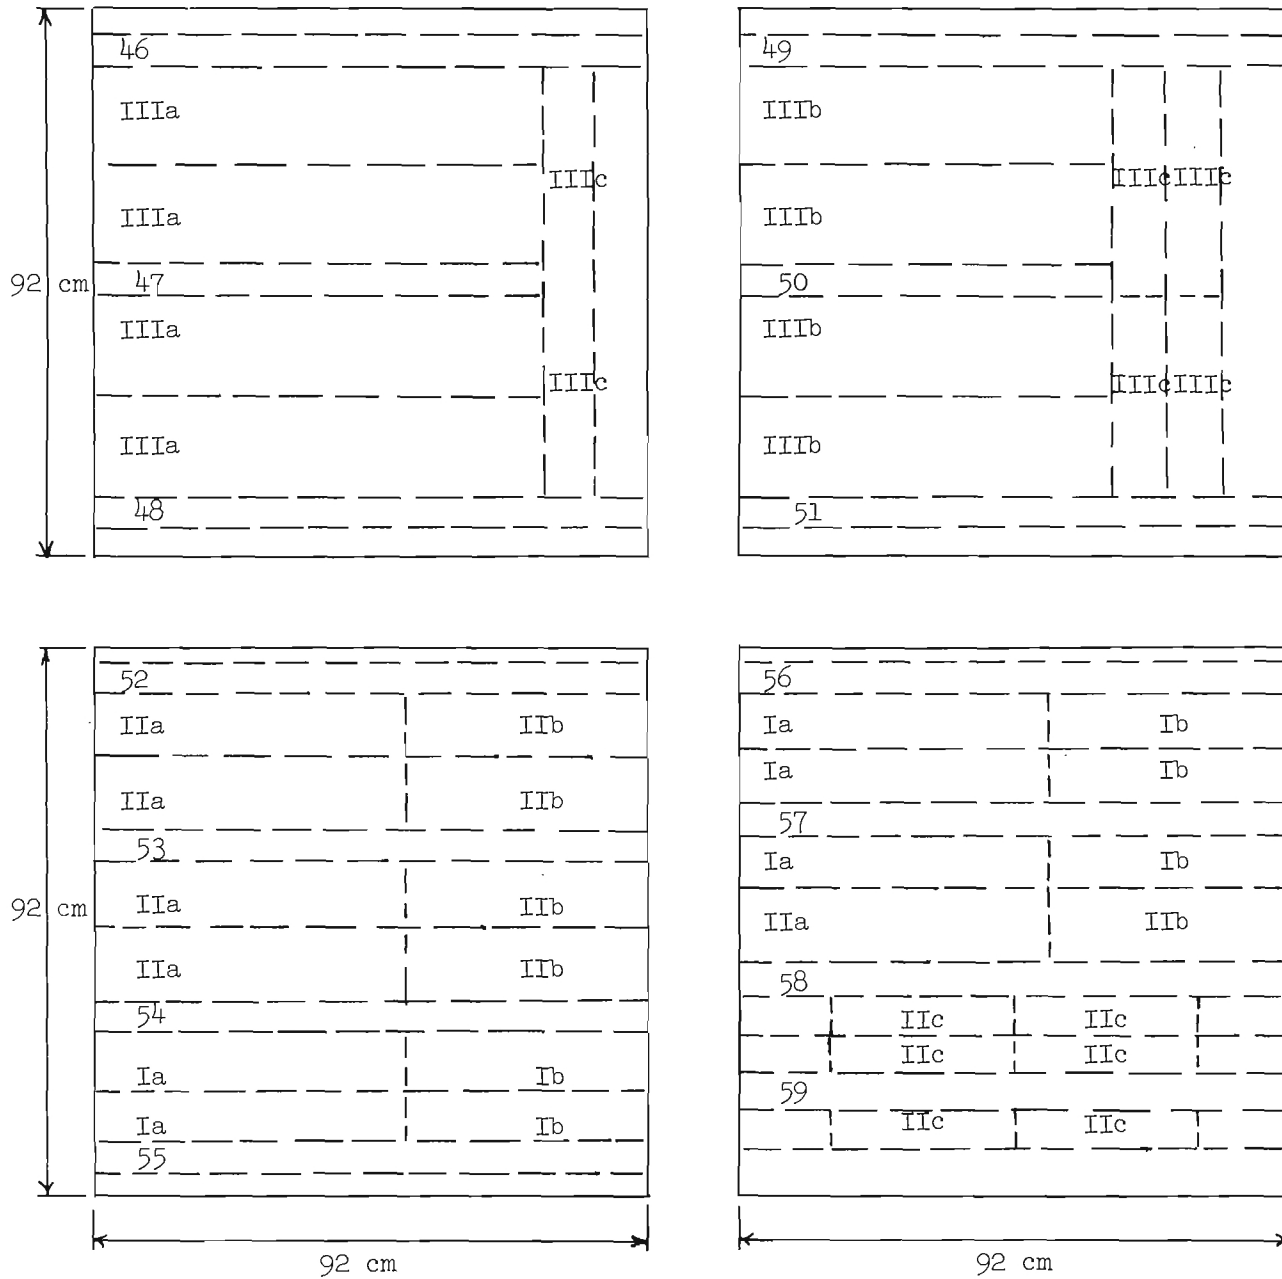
Layout of Components of the Test Specimens from 1.89 cm Steel Plate.
